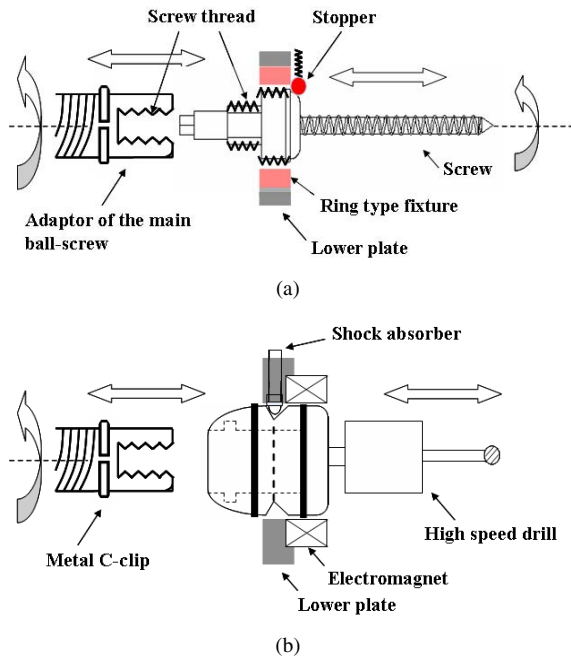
Connection mechanisms between the main ball-screw and surgical tools: (a) Joining between the main ball-screw and a screw (b) Joining between the main ball-screw and a high-speed drill.
